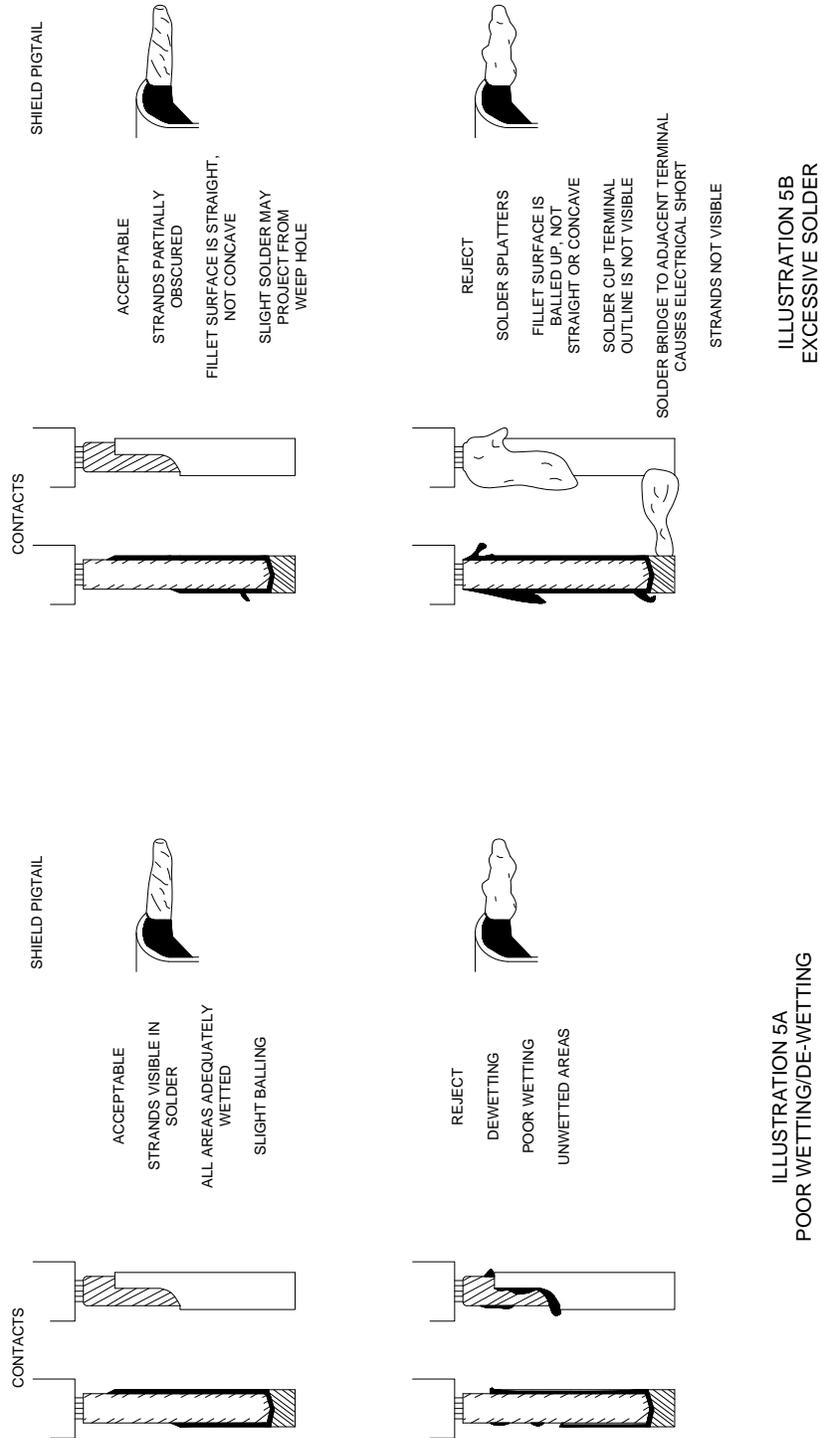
A6. Conductor contact soldering techniques - Continued.
